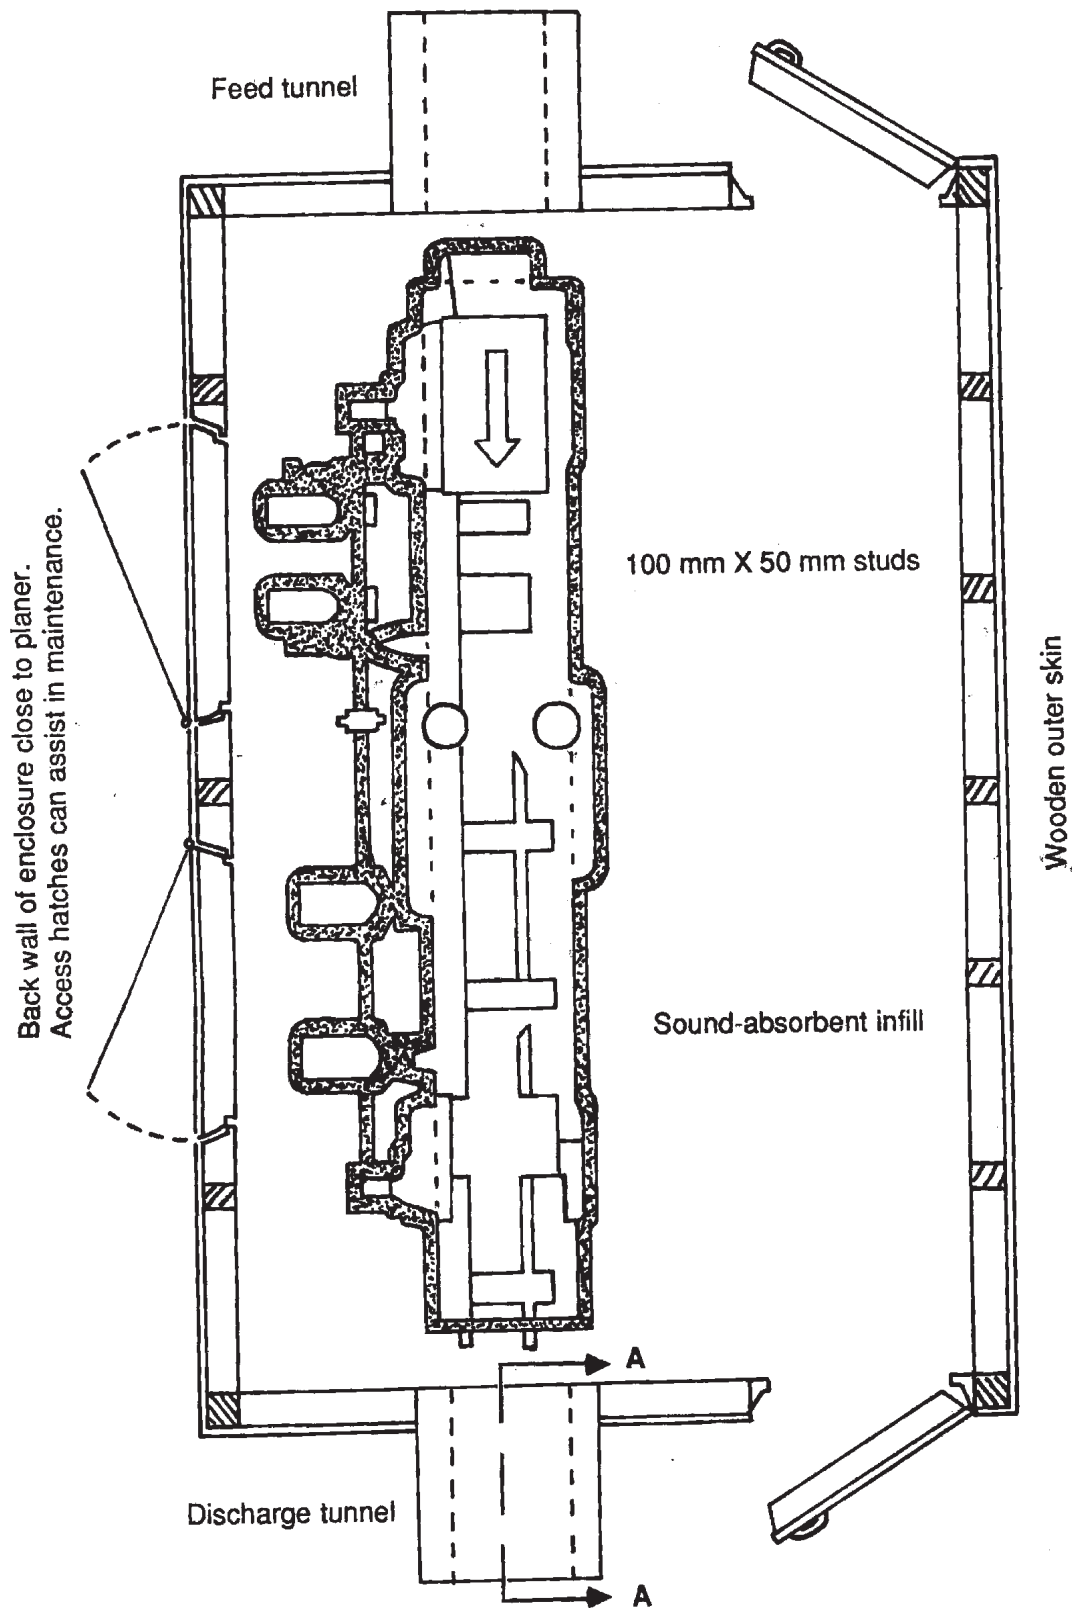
Typical layout of an acoustic enclosure for a multi-head planer
